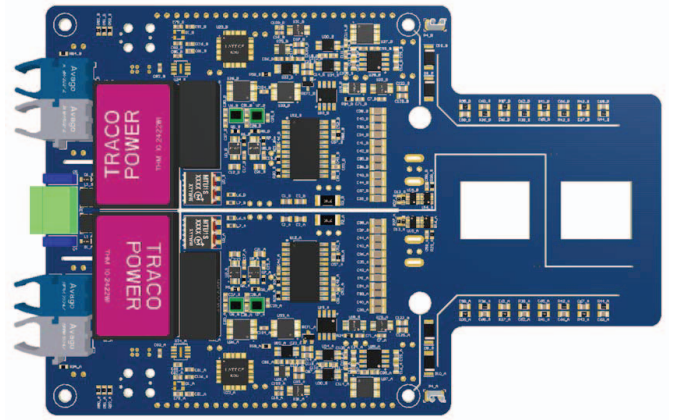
3D-layout of the gate driver board with integrated sensors
